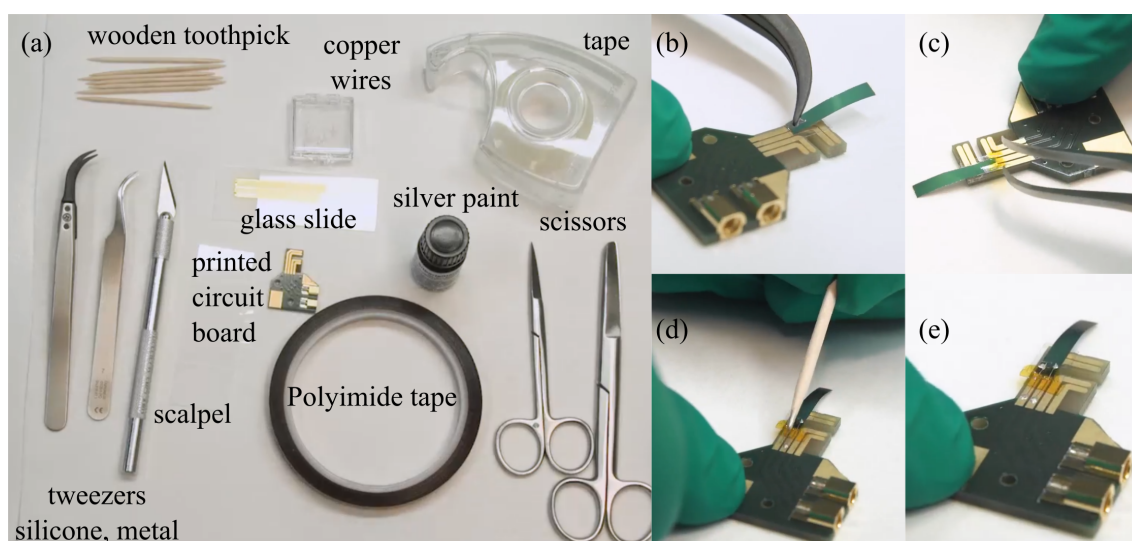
Tools used and steps in contacting a thin-film solar cell. (a) Necessary tools. (b) Gluing the thin film solar cell onto the printed circuit board. (c) Fixing and insulating the cell with polyimide tape. (d) Contacting the back and front contact with the respective lane on the circuit board via copper wires with silver paint. (e) The finished contacted device. This is adapted from Ossig, C., Nietzold, T., West, B., Bertoni, M., Falkenberg, G., Schroer, C. G., Stuckelberger, M. E. X-ray Beam Induced Current Measurements for Multi-Modal X-ray Microscopy of Solar Cells. *J. Vis. Exp.* (150), e60001, doi:10.3791/60001 (2019).
